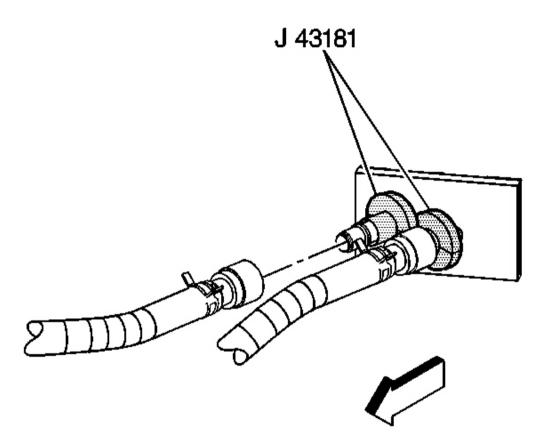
Identifying Heater Hose To Heater Core Outlet Courtesy of GENERAL MOTORS CORP.
